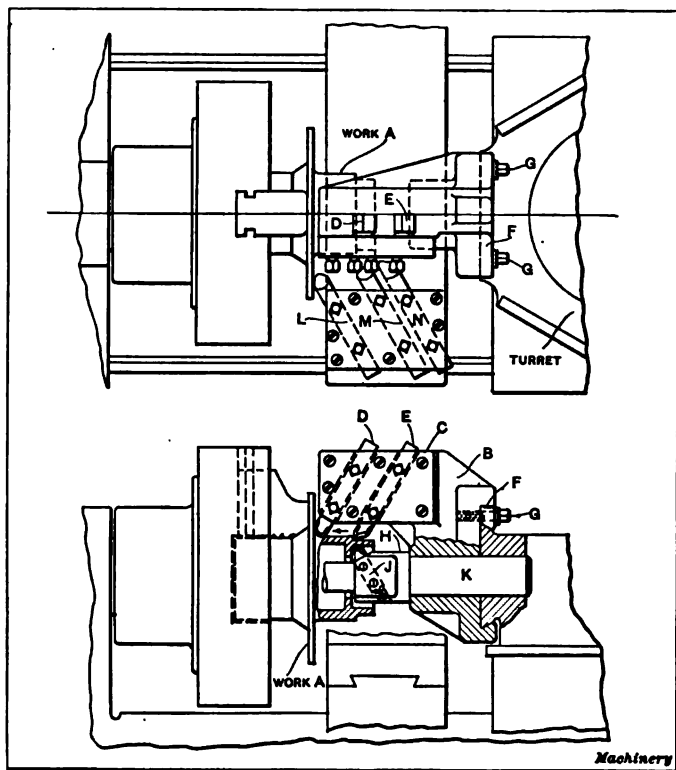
Multiple Tool-holder for Machining Automobile Hubs
